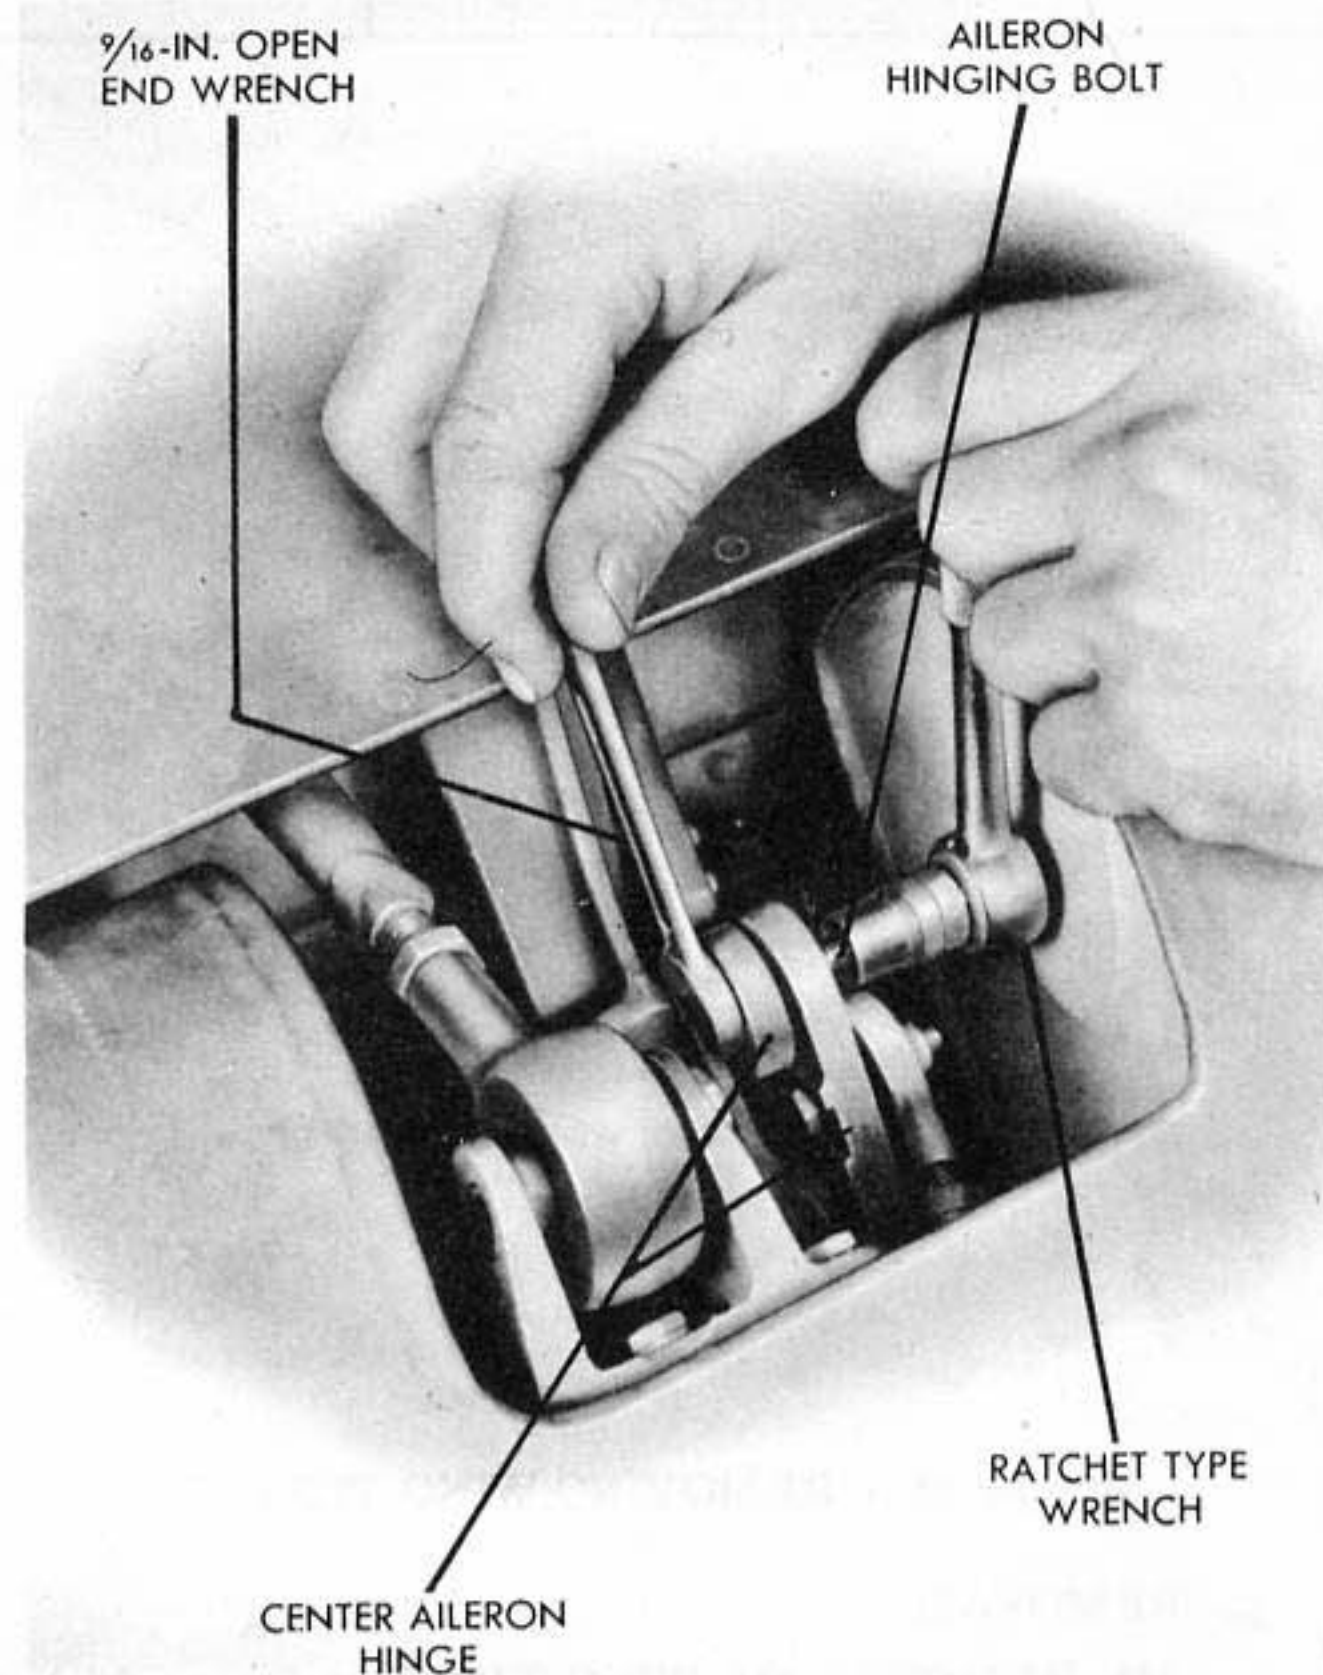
REMOVING AILERON INNER HINGING BOLT
